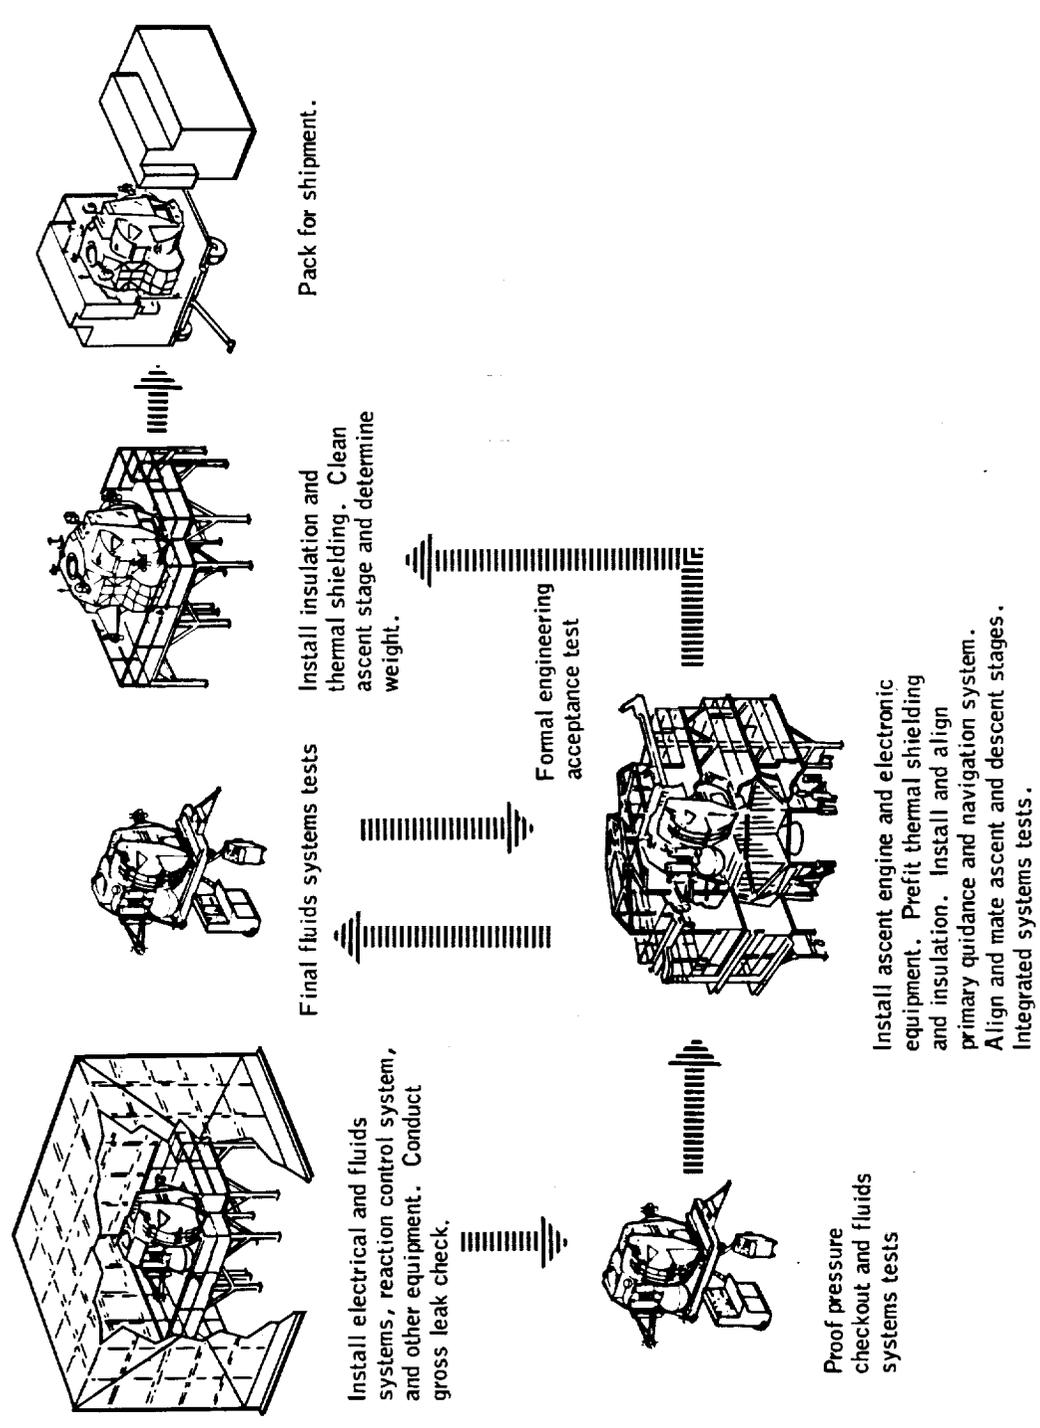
Ascent stage assembly and checkout - Concluded.
